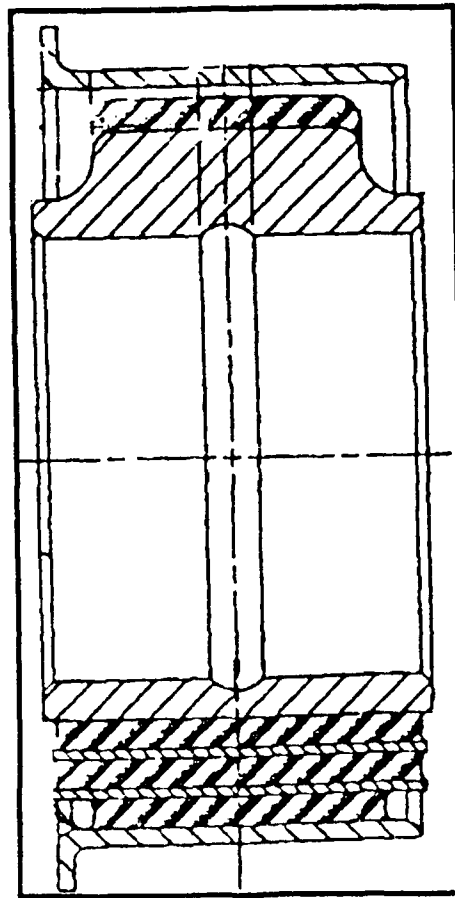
Cross-section drawing of drag brace elastomeric bushing assembly with 0 and 90 degree cuts through Figure 5.1-2.
